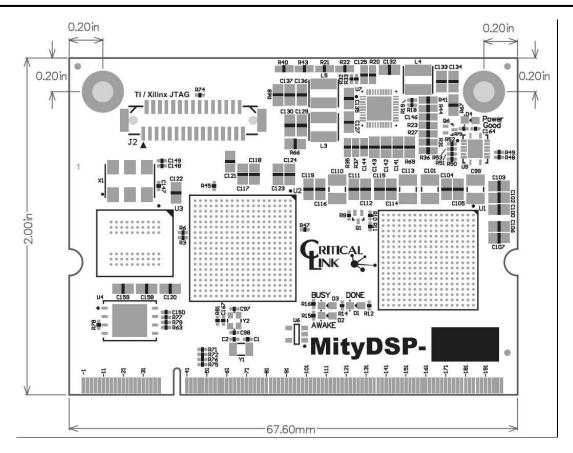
MityDSP-L138F, MitySOM-1808F, MityDSP-6748F Mechanical Drawing
